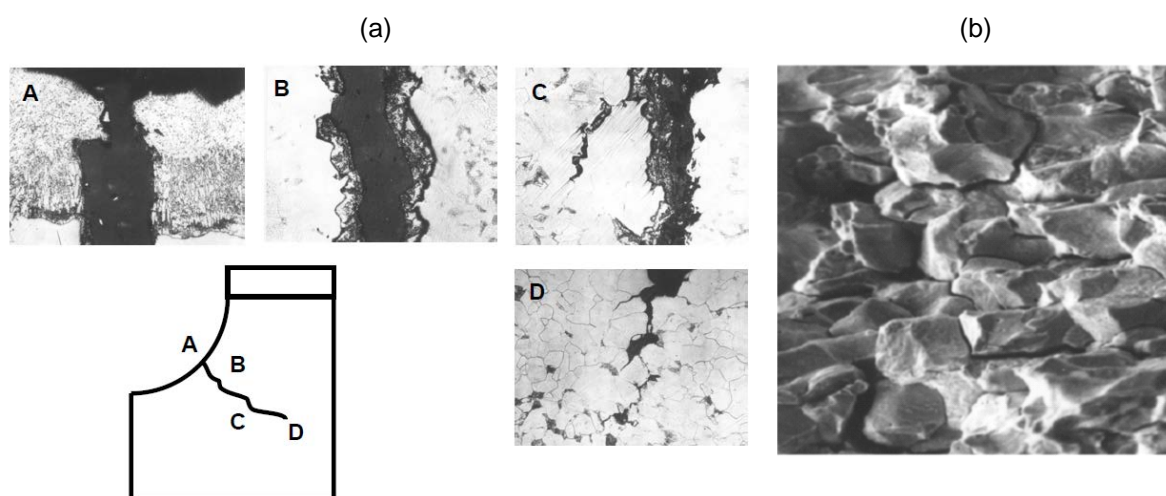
Cross section (a) and fracture surface (b) observations of crack formed during galvanizing [KIN 04]
